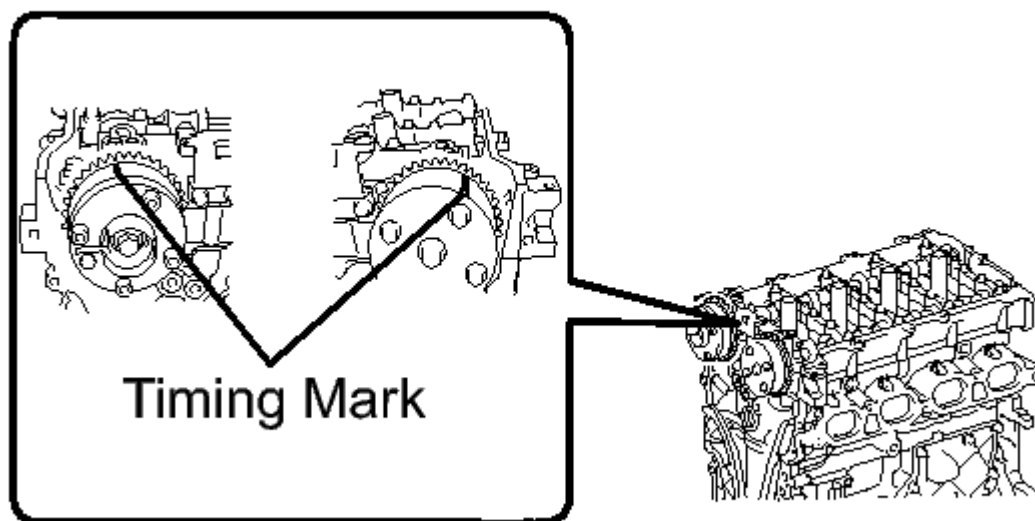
Identifying Timing Mark On Camshaft Timing Gears
